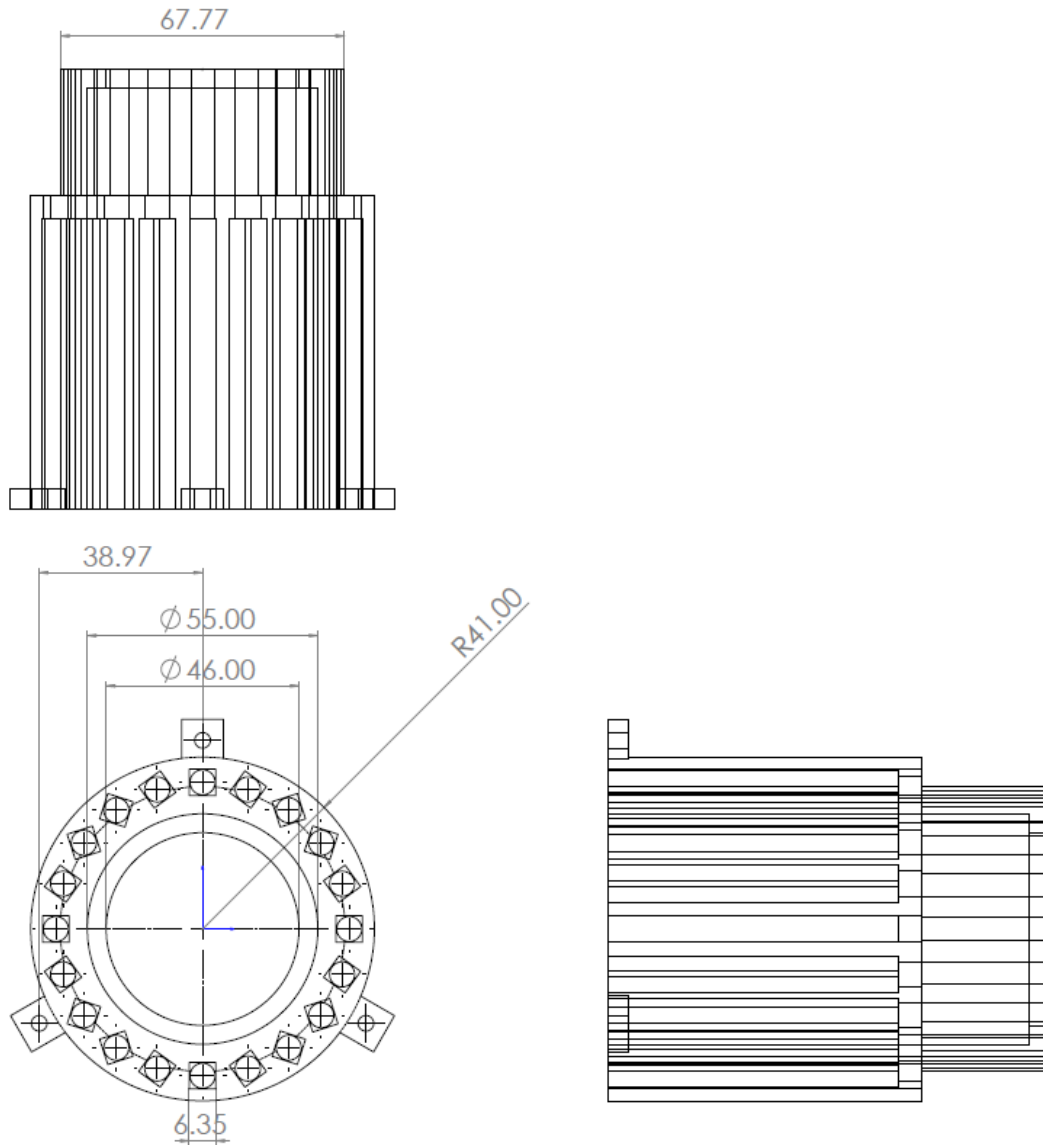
Engineering drawings of the rotor that contains the Halbach magnet cylinder.
